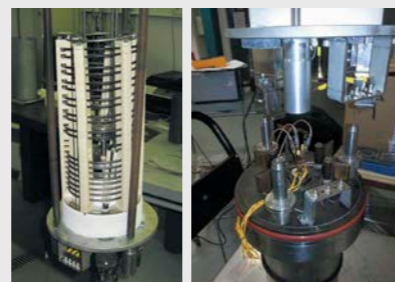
HIP resistor and its plugging onto the bottom HIP unit plug
